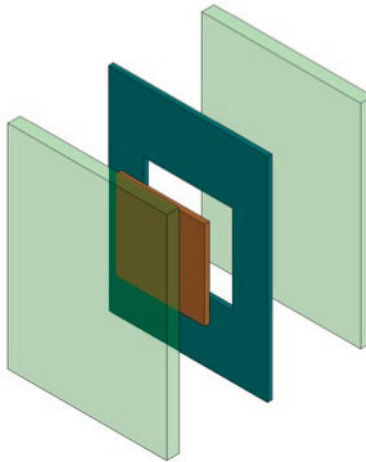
The four components of a Zircaloy-clad fuel plate: Two covers, a frame, and a fuel coupon.
